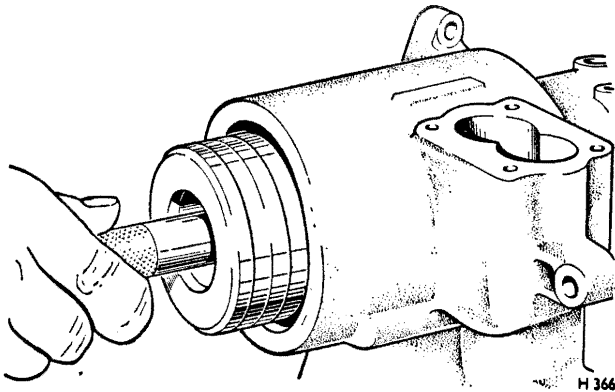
INSTALLING RACK-PISTON ARBOR TOOL IN END OF WORM
